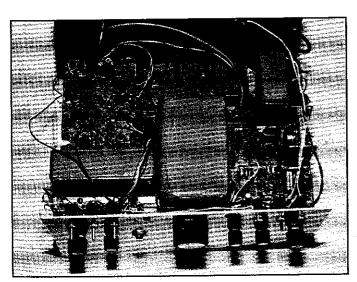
Bottom view of main printed wiring board, which serves as a chassis. This is a double-sided board which is cut as necessary for clearance. Isolation pads are cut in the foil for use as tie points. Some components are mounted below the board, which is spaced about 3/8 inch above the bottom of the cabinet.
